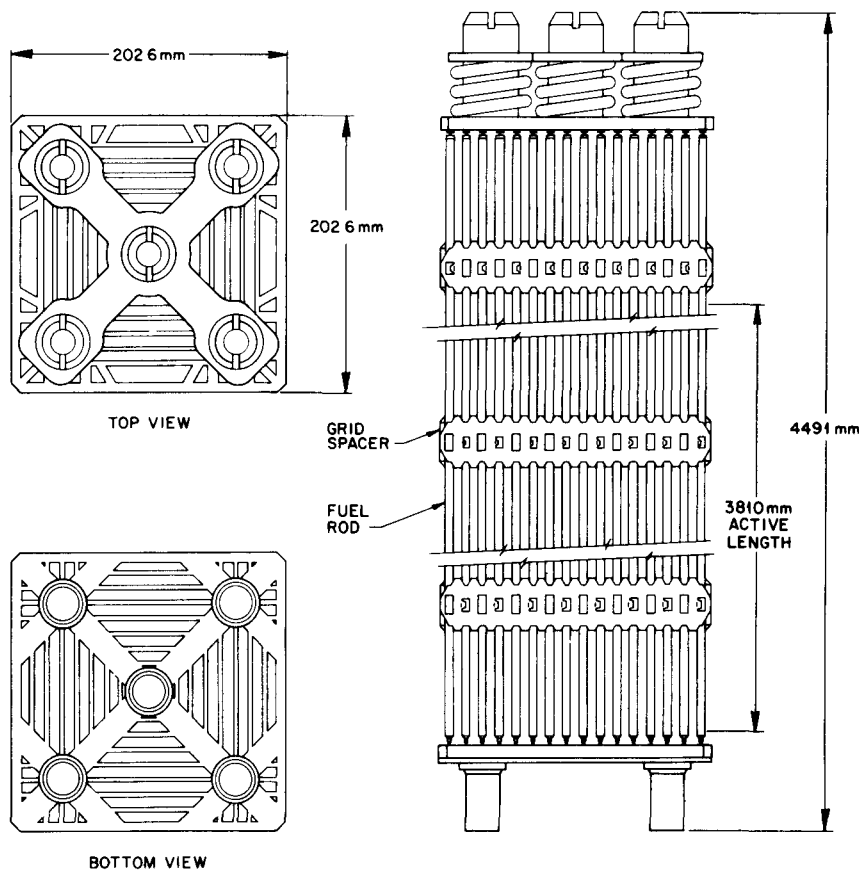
Combustion Engineering system 80 – 16 × 16 array PWR fuel assembly.
